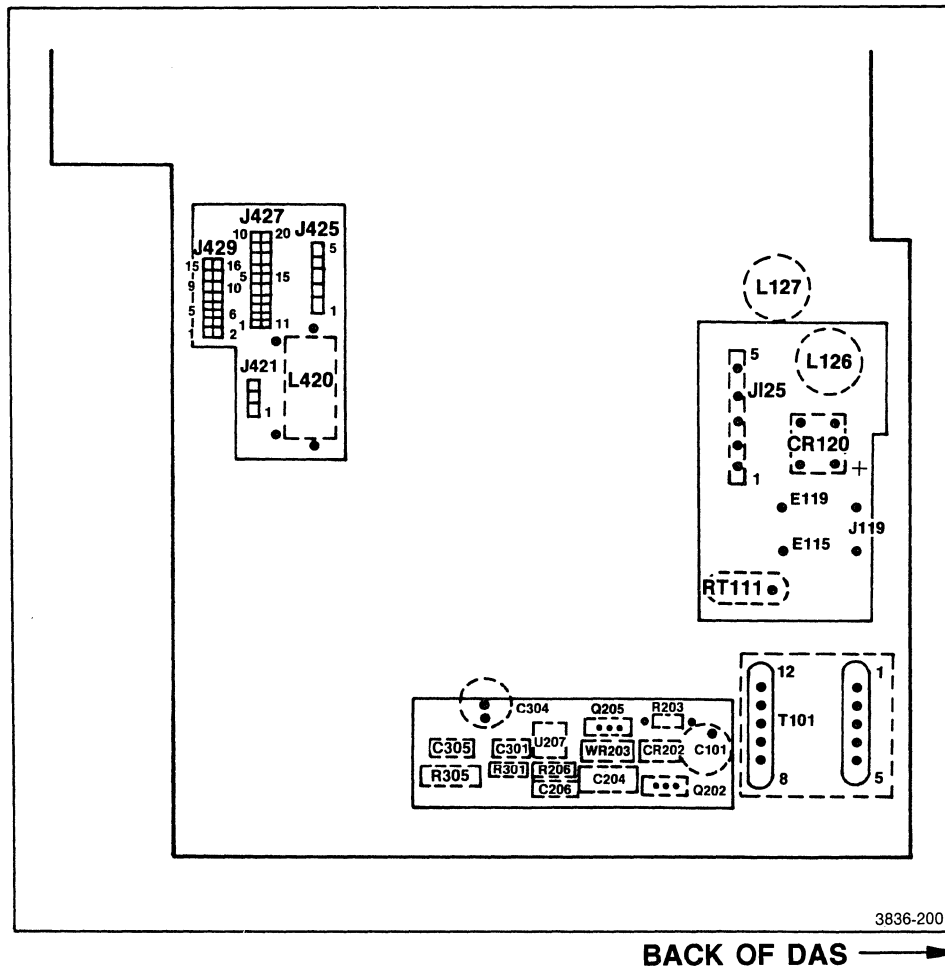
Interconnect board components are accessible when the bottom panel is removed (COLOR ONLY).
